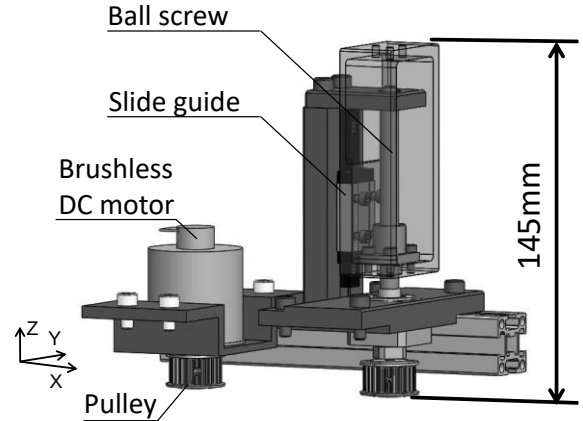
CAD of the linear force reproduction unit. In addition, a contact part is implemented on the upper part.
